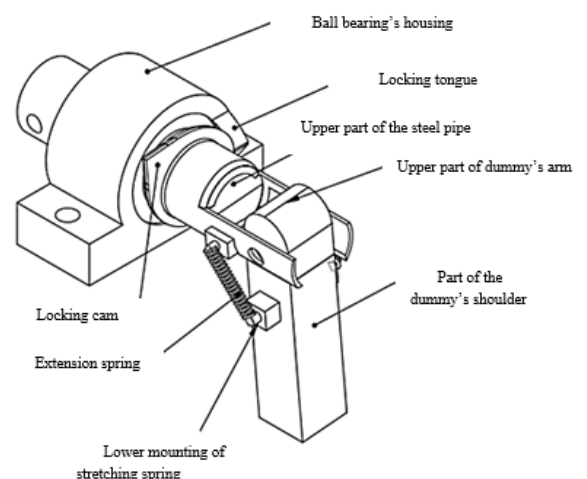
Shoulder Joint KPSIT C50 Physical Dummy.
